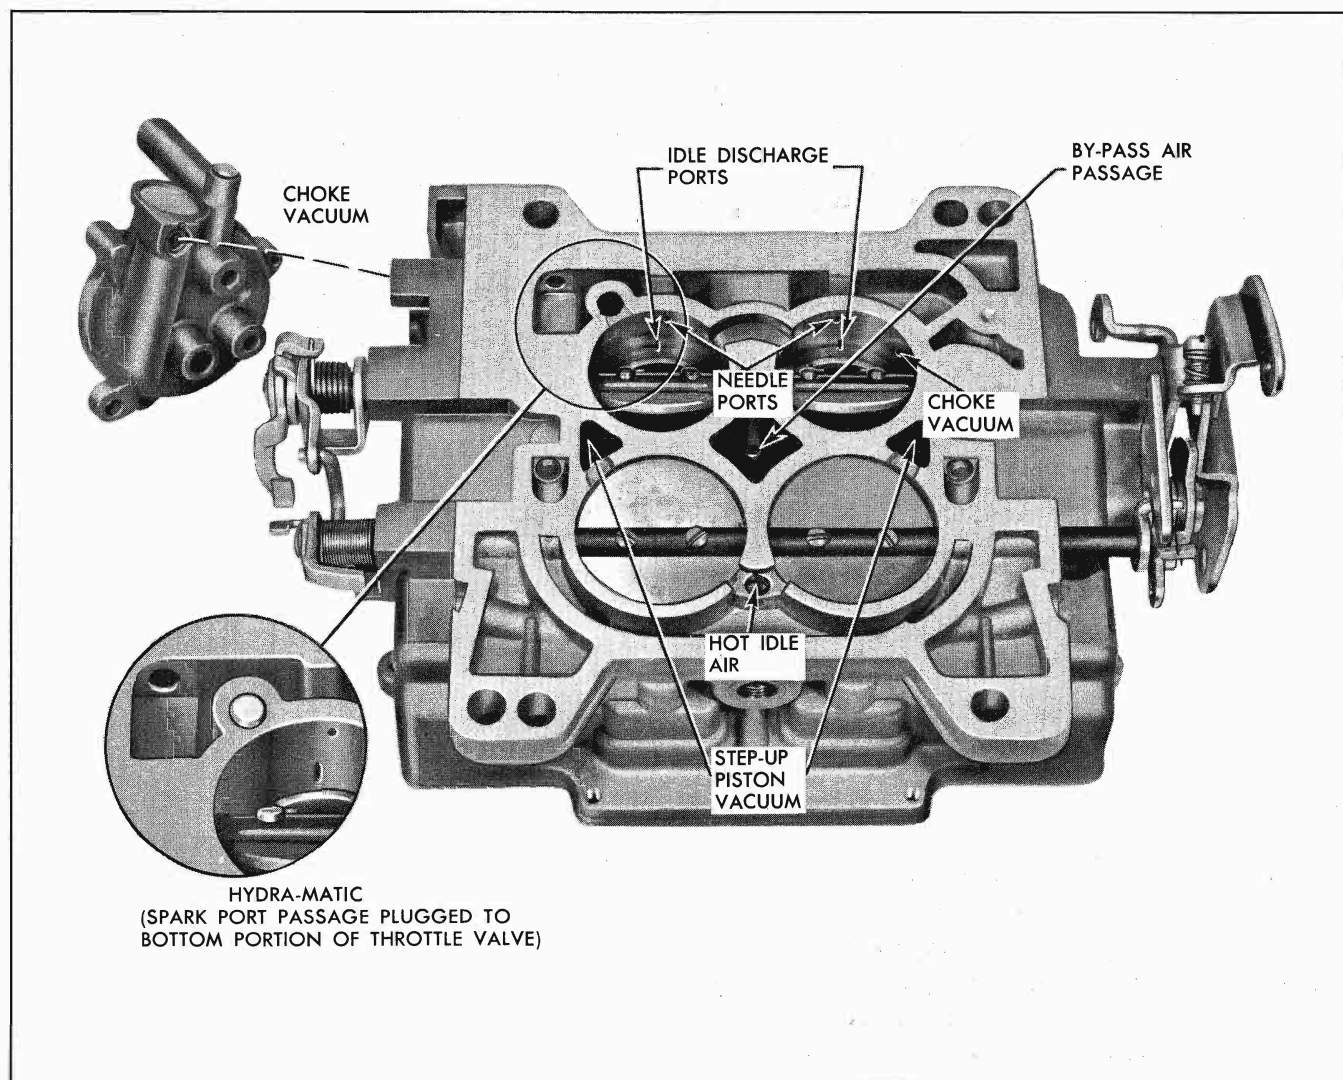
B-87 Passage Identification—Flange Area of Body (Super Hydra-Matic Shown)
